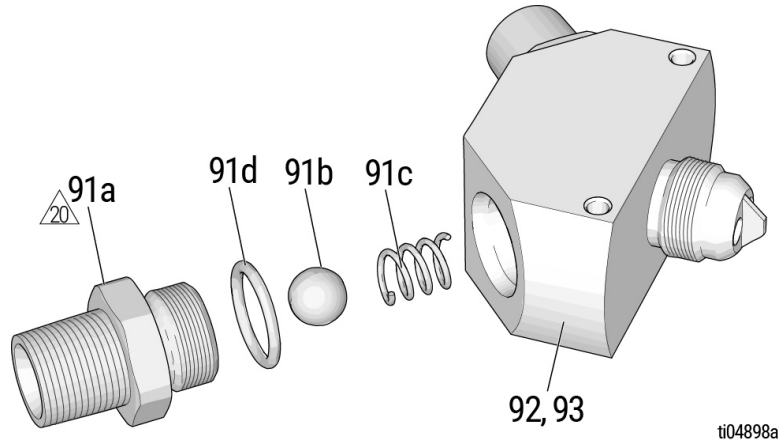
TruMix™ 150 XT Manifold Assembly Parts Diagram
